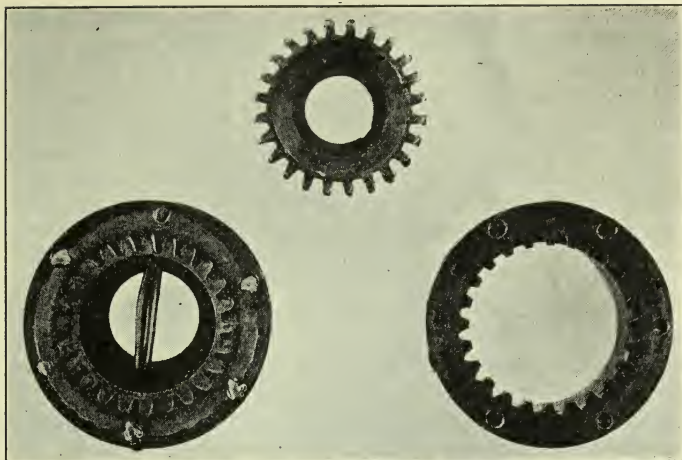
MAGNETO COUPLING IN WHICH THE RIVETS HAVE BEEN SHEARED AND THE SPLINES WORN AS A RESULT OF THE TORSIONAL VIBRATION TRANSMITTED FROM THE CRANKSHAFT
